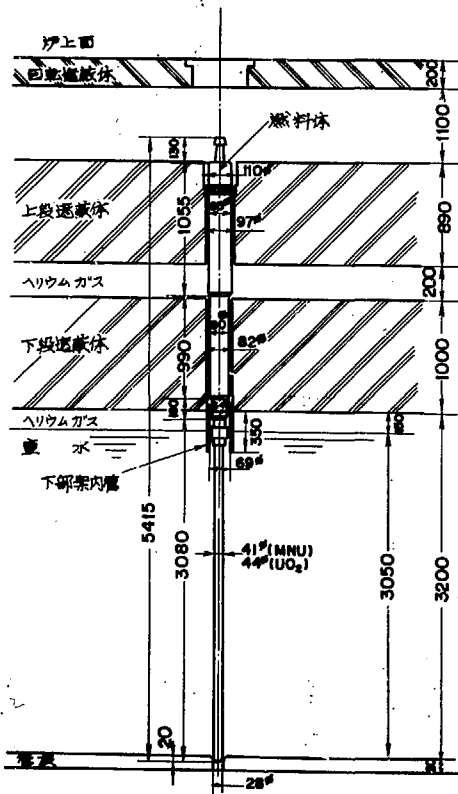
Schematic cross-section of fuel assembly hole in JRR-3.
